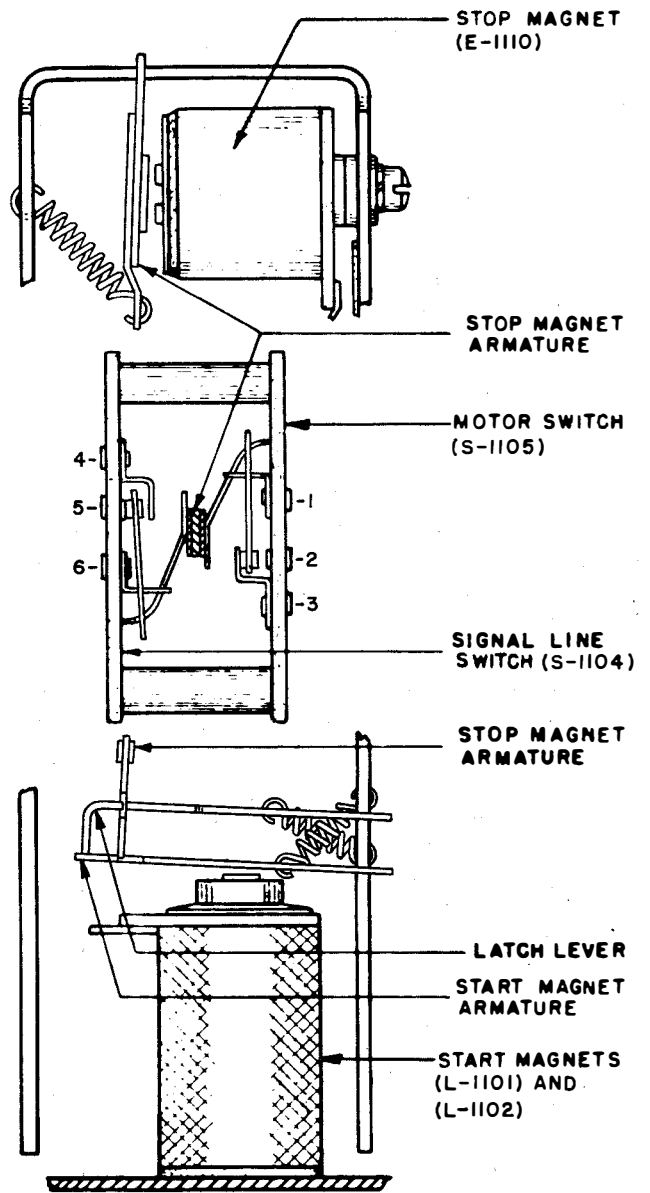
Electrical Motor Control Mechanism, Open Line Position.
